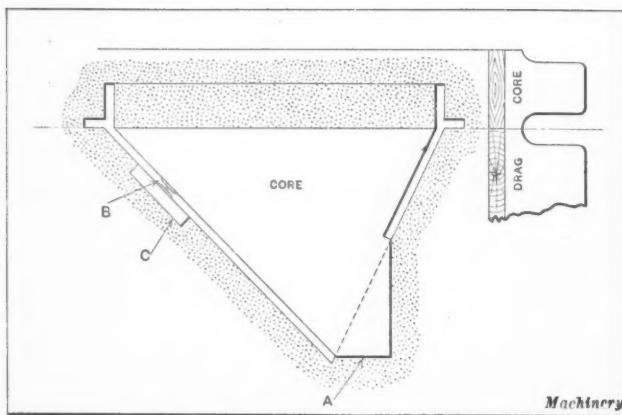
Cross-section of Hopper Casting Mold using Dry Sand Core with Special Supporting Provision
